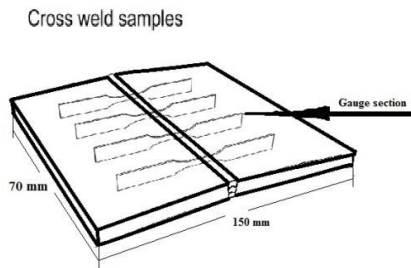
Figure III. A schematic diagram shows the tensile coupons cross weld samples in transverse directions and all weld samples in longitudinal directions.
